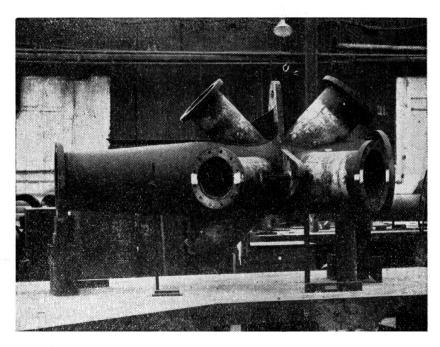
Checking of heel plates after welding on junction piece
